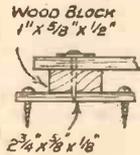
The block for clamping the pantagraph to the drawing board.
